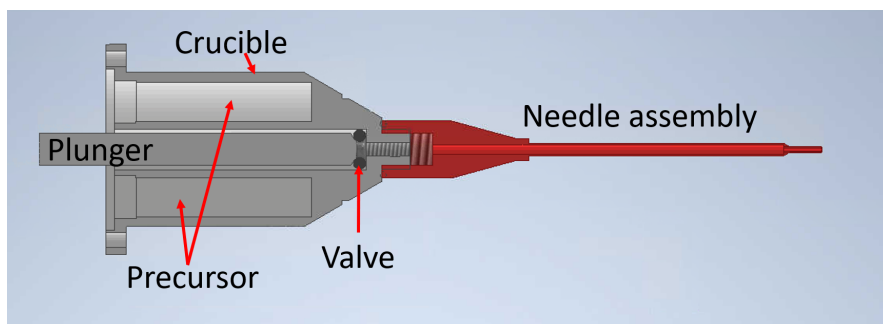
CAD drawing of the original GIS needle assembly along with the crucible and plunger.
